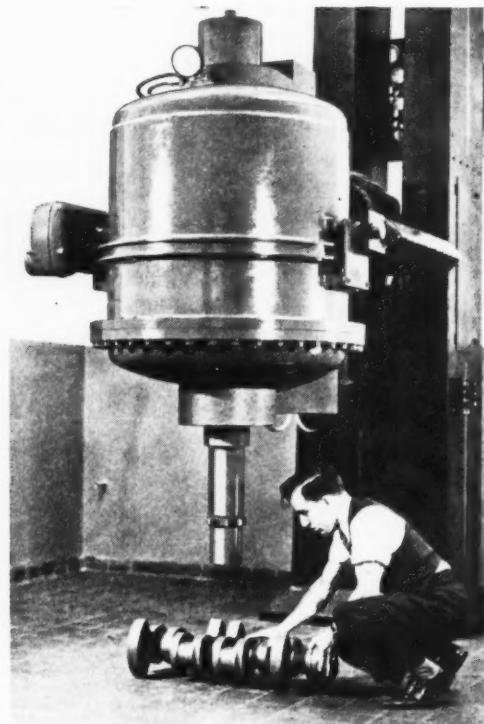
Another Million-volt X-ray Machine, Mounted on a Column Type Support, Being Used to X-ray a Crankshaft in the Chemical and Metallurgical Department of the Ford Motor Co.
